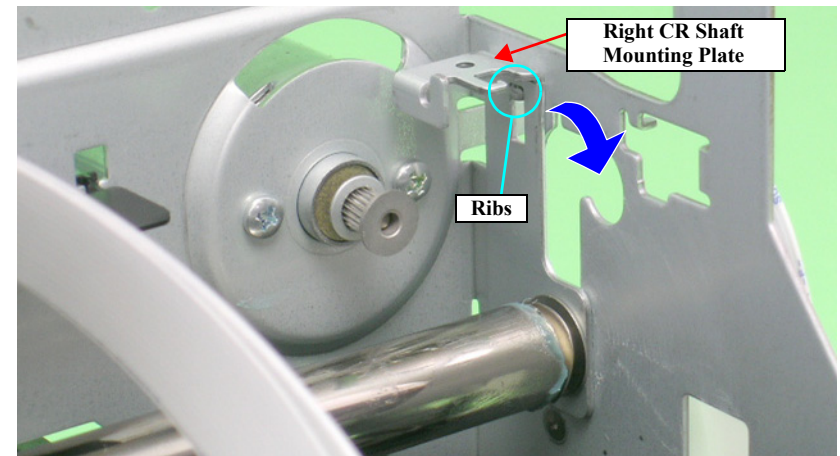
Rotating the Right CR Shaft Mounting Plate
